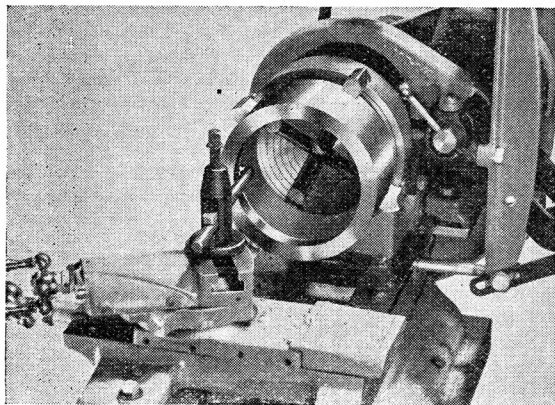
Boring the inside of a large steel bushing. Note high-speed boring tool mounted directly in tool post for maximum rigidity.
